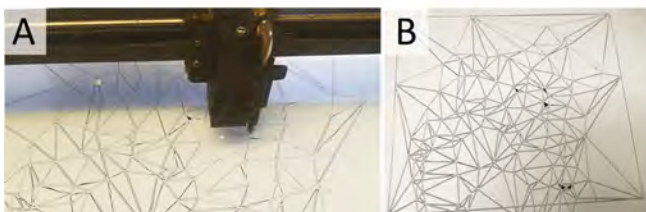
(A) Laser cutting polypropylene sheet (0.8mm depth) and (B) fabricated polygonal surface.
